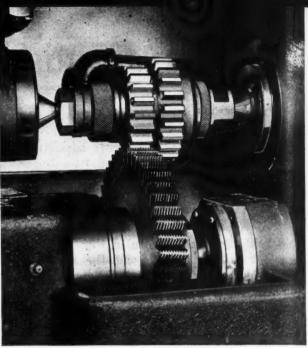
Close-up View of an Under-pass Type Shaving Operation being Performed on the Eighteen-tooth Step Gear of the Reverse Idler
